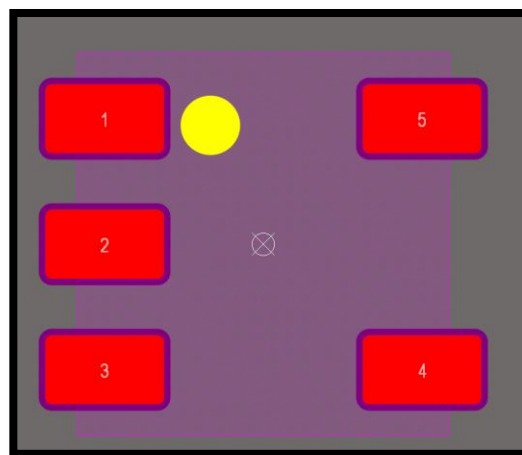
The PCB Footprint for the One-Channel AND-Gate; SN74LV1T08DBVR
